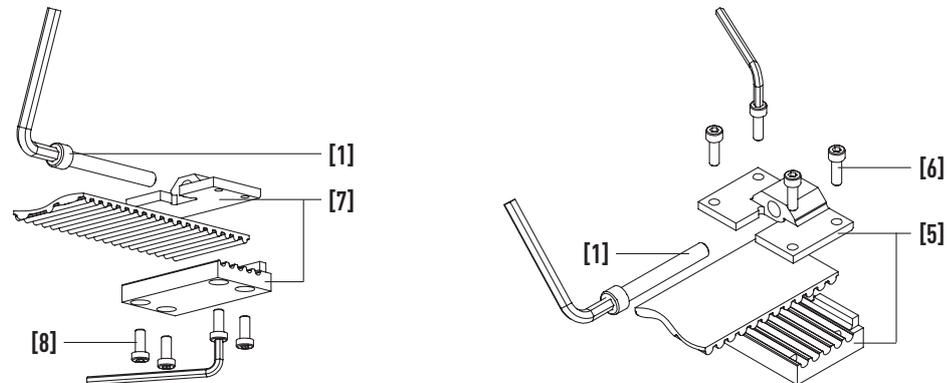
Removing the toothed belt from the belt tightener (left: HT150B, right: HT200B, HT250B)
